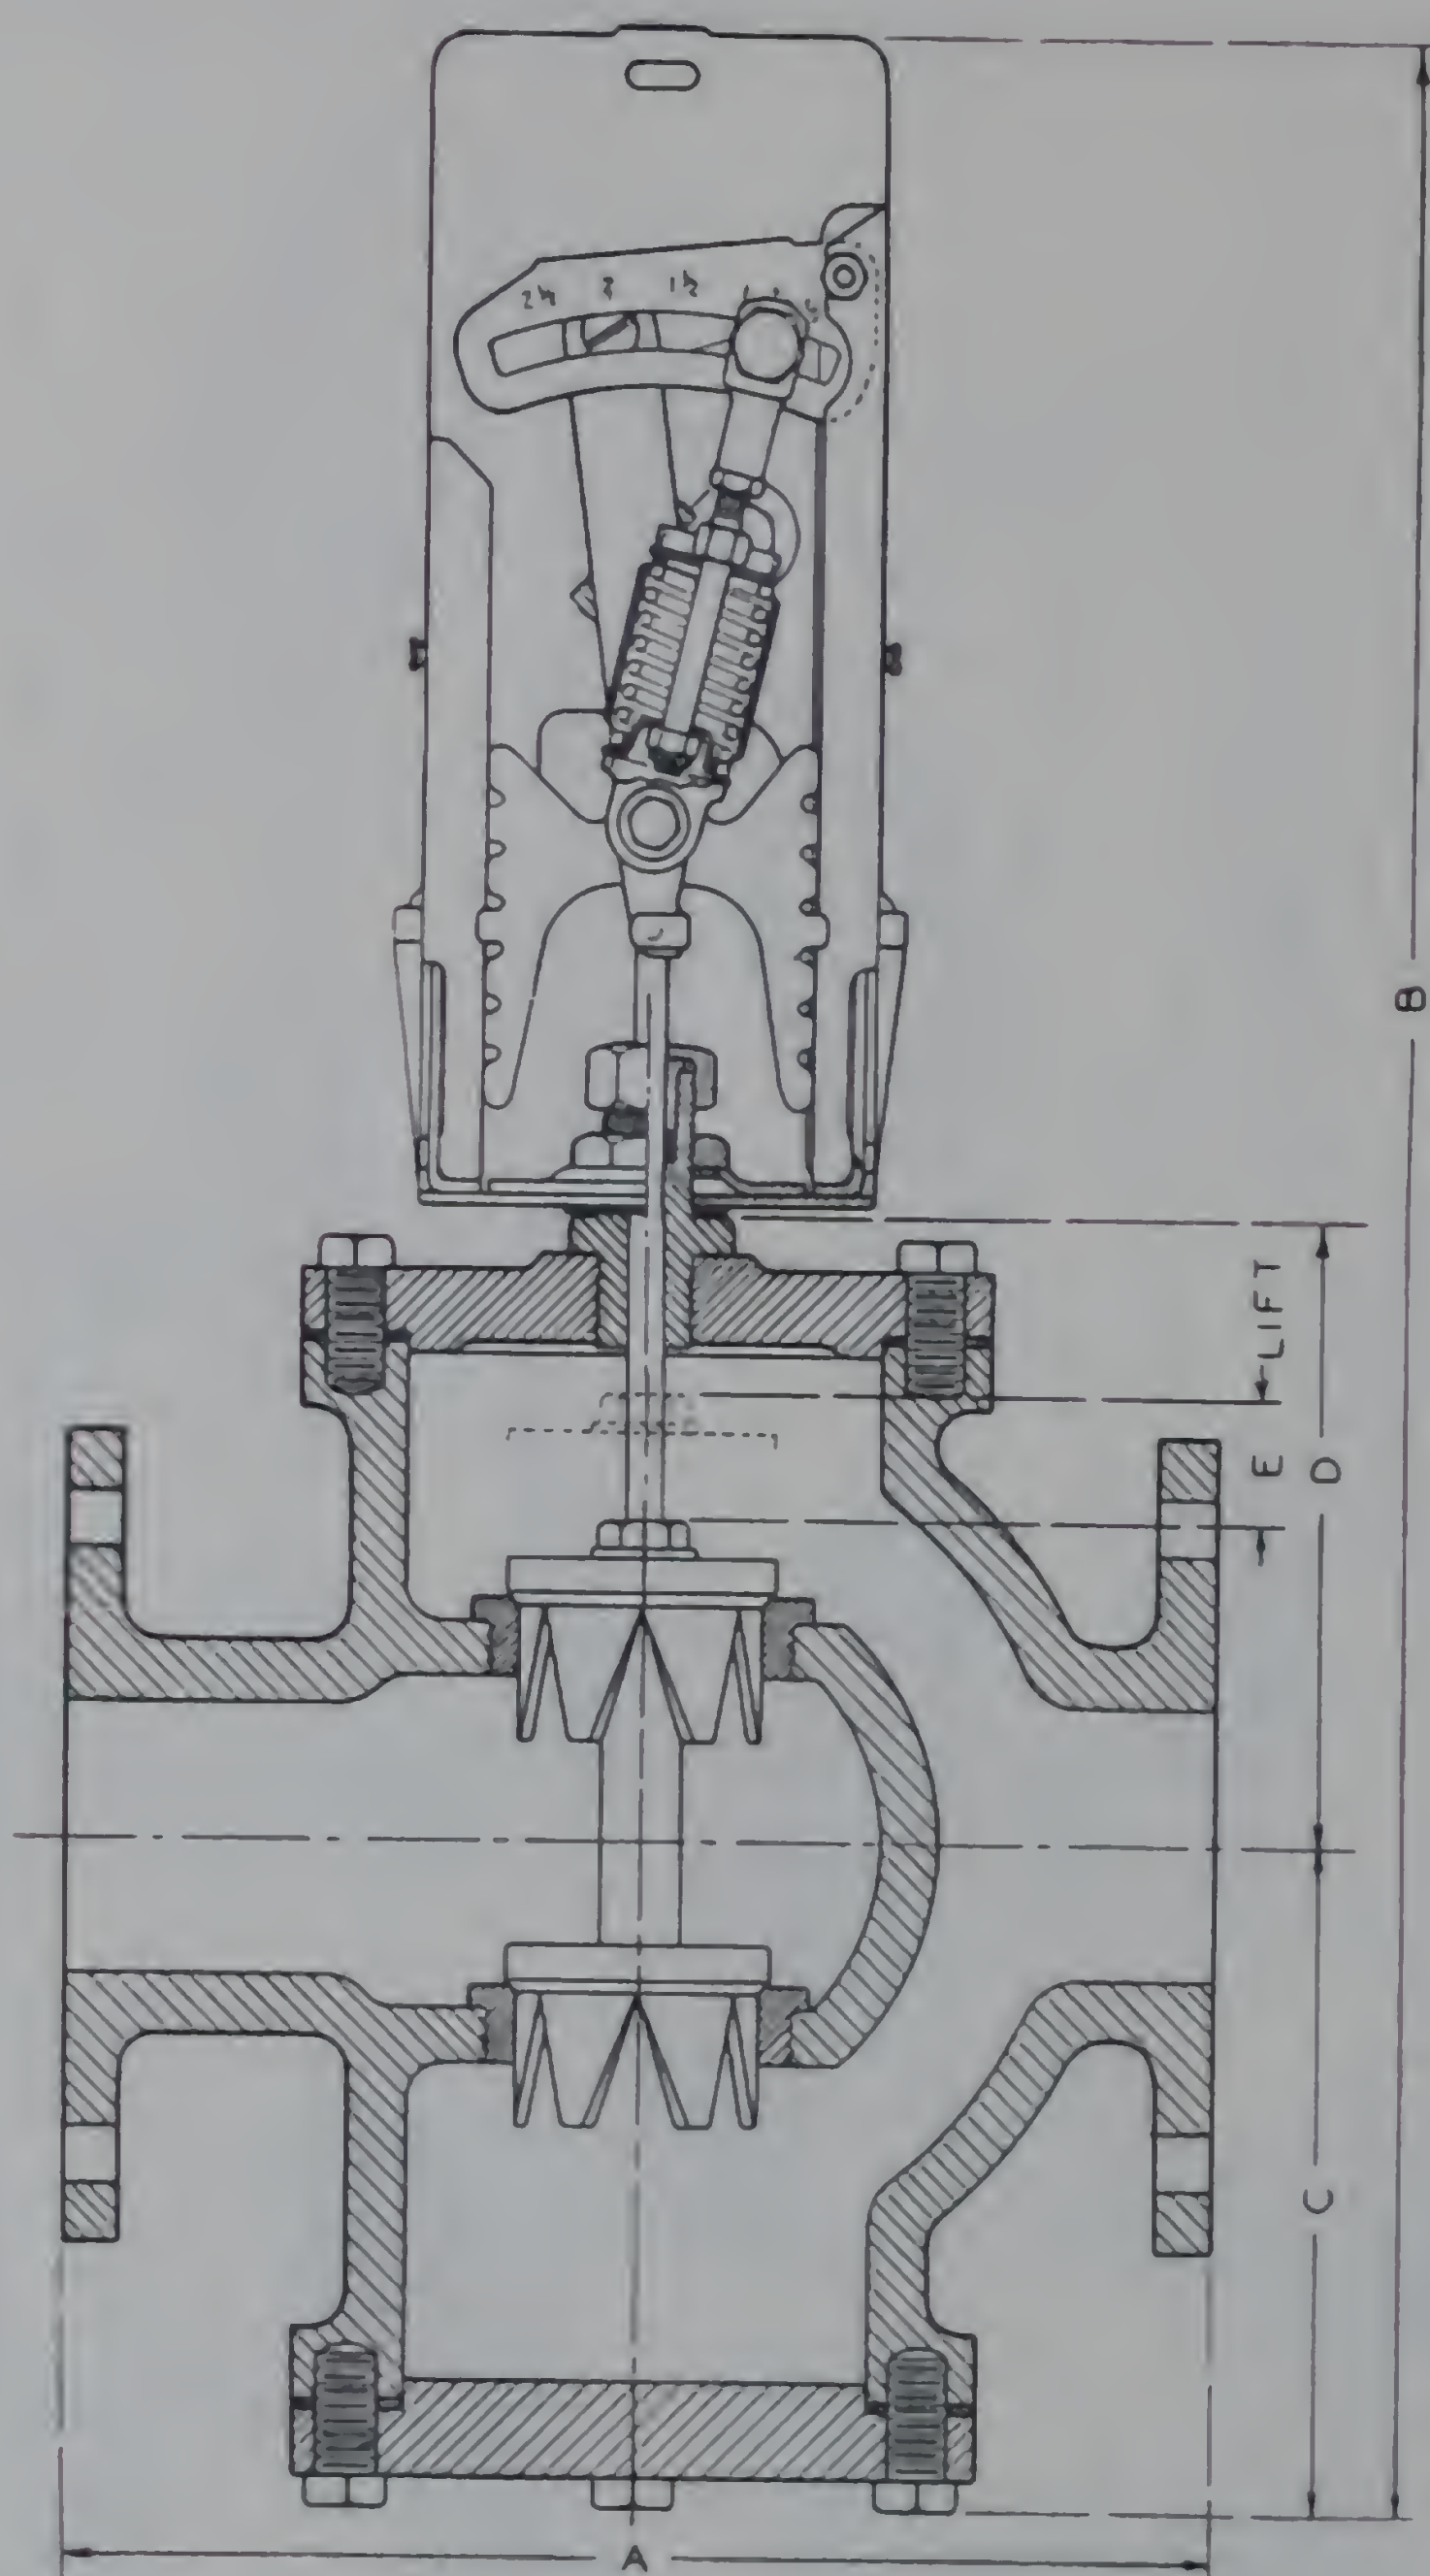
Dimensional drawing of flanged Type K201B Motorized Valve.
